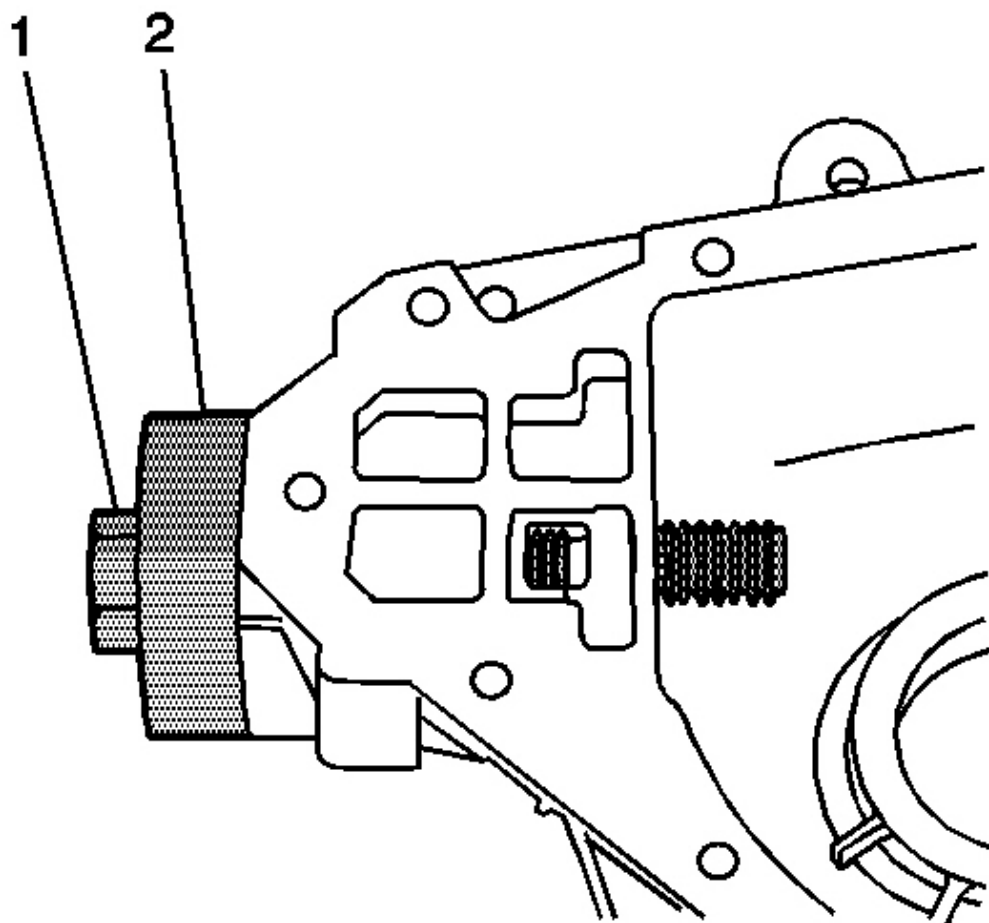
View Of Special Tools J 45228-1, J 45228-5 & J 45228-4
